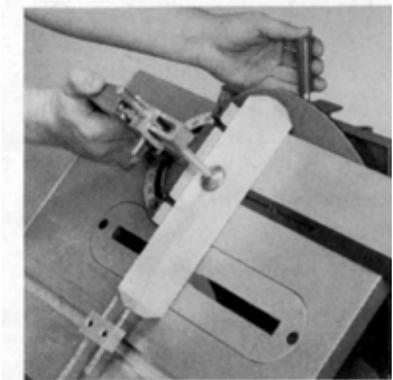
Boards can be sanded to width using this setup. In this case the worktable is tilted to sand a bevel. The large arrow indicates feed direction; the small one indicates the gap needed between the workpiece and the "rear" half of the disc.
